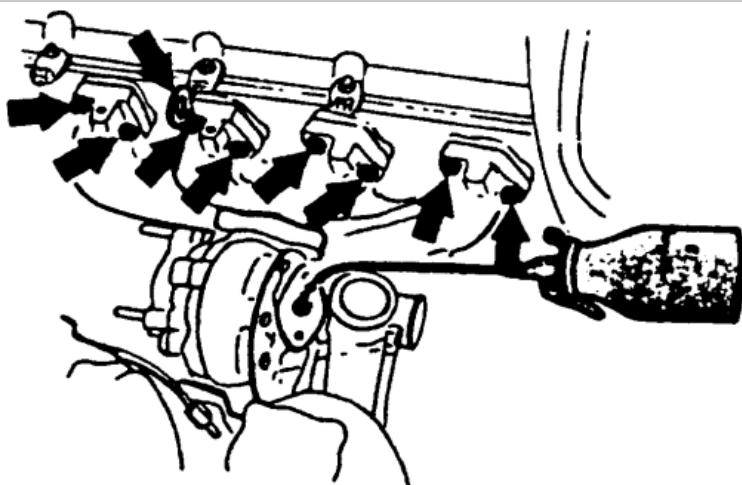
Lubricating the exhaust manifold bolts with a proper rust penetrant or lubricant aids their installation into the cylinder head. Note the manifold bolt locations
